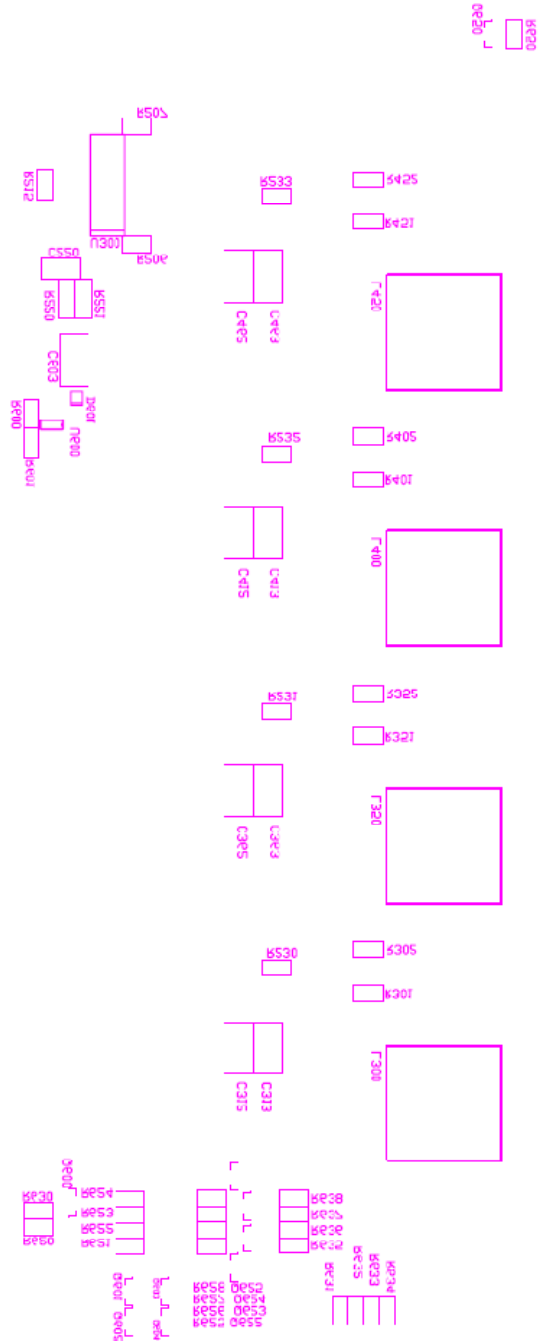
PCB design of bottom overlay corresponding to the test board of Figure G.3.1.
